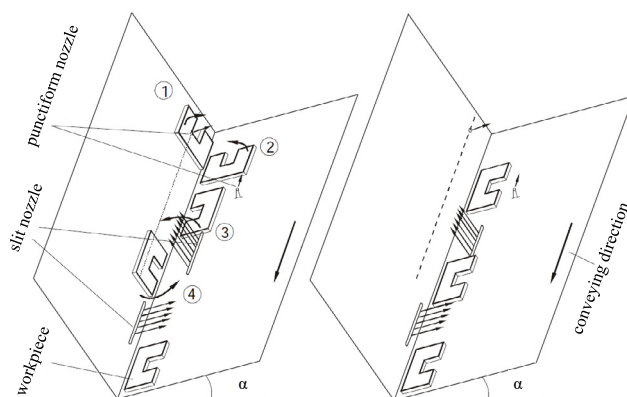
Actuator design and arrangement for an exemplary workpiece [1]
